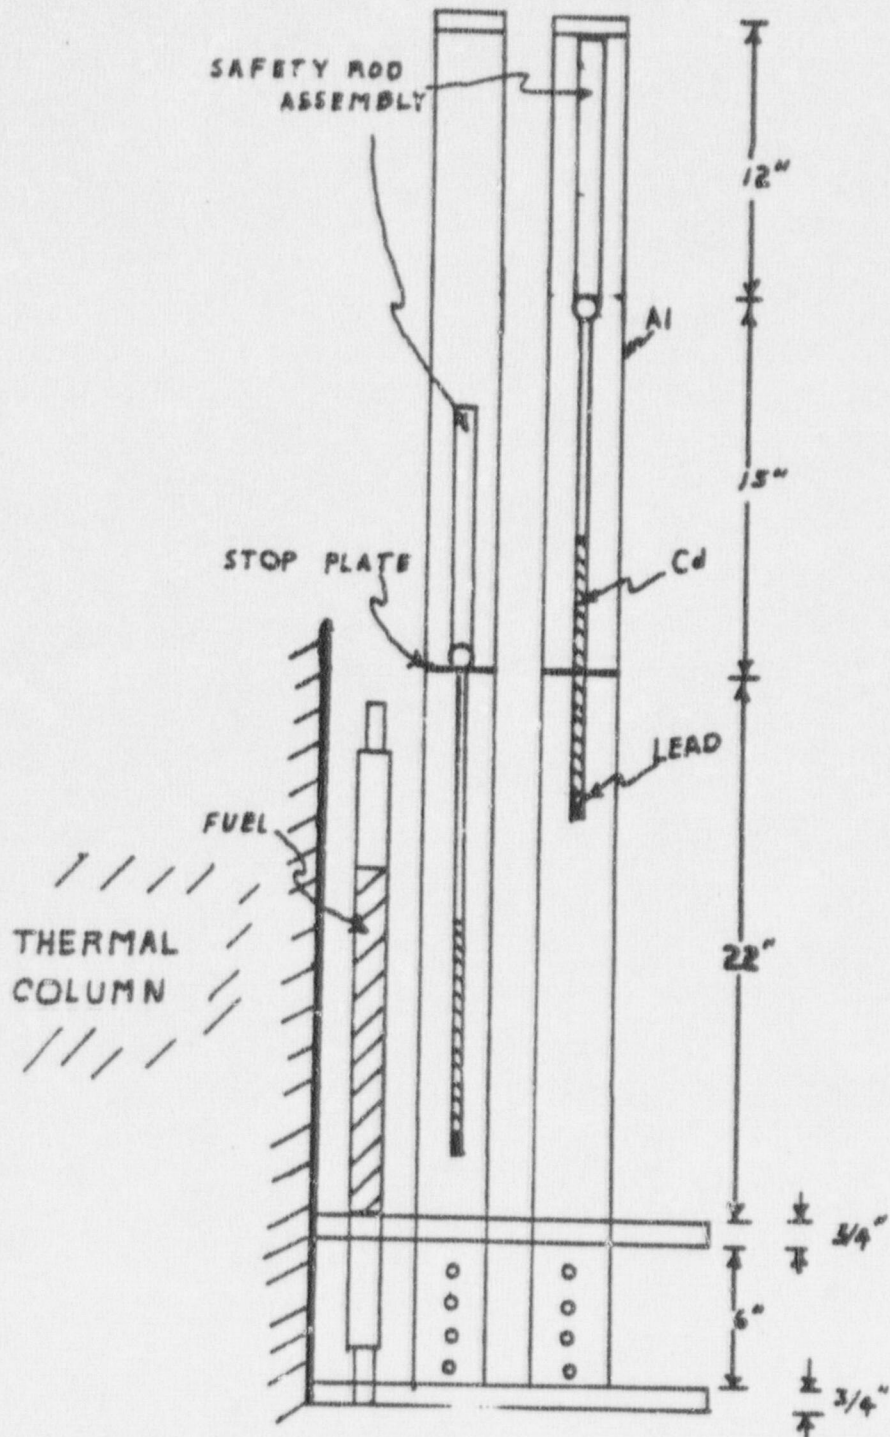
Sketch of Side View of the Safety Control Rods Showing the Fully Inserted and Fully Withdrawn Positions
